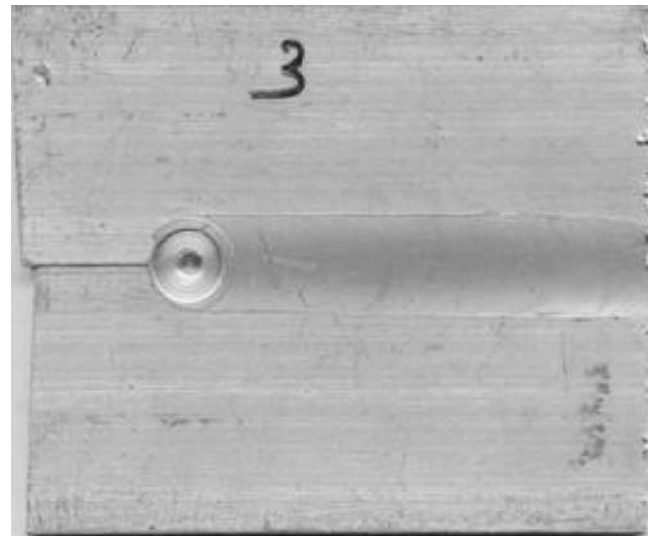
Processed gray level image of a uniformly welded plate
